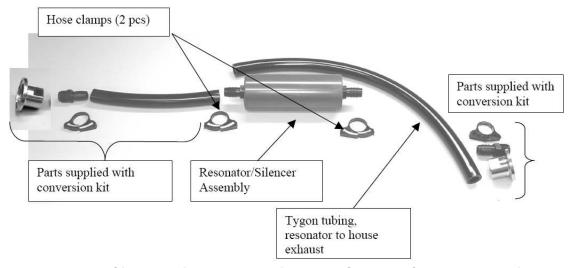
Exhaust Silencer Kit: Exploded View - For Systems Converted to Triscroll Pumps
